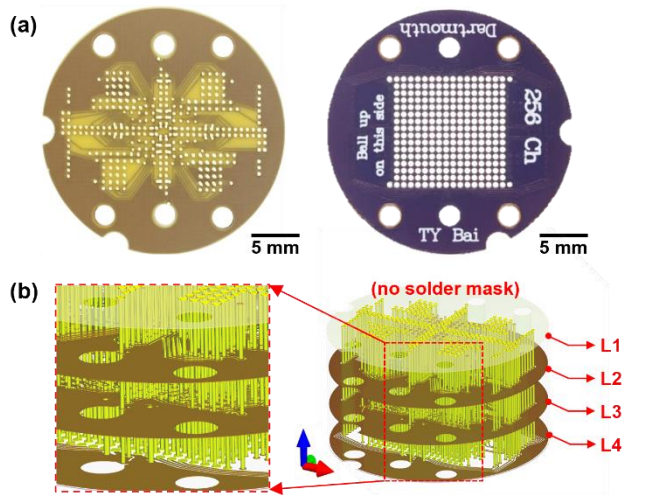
Adapter PCB design and high-density routing strategy. (a) Optical photographs of the adapter PCB. The top side (left) features a 256-channel gold pad array designed without a solder mask on the top side of the first layer, allowing the gold-plated pads to remain extruded from the surface to facilitate intimate mechanical engagement with the elastomeric conductive pillars. The bottom side (right) features a high-density 256-channel BGA chip for interface integration. (b) 3D exploded view illustrating the 4-layer fan-out architecture and the implementation of vertical interconnects using blind vias.
